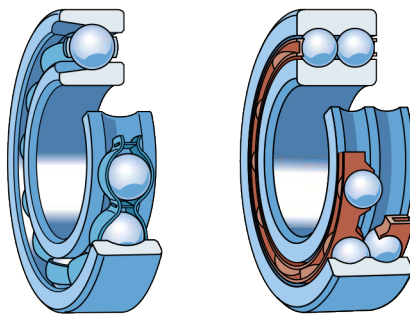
A deep-groove ball bearing (one row) on the left, and a double-row deep-groove ball bearing on the right [3].
